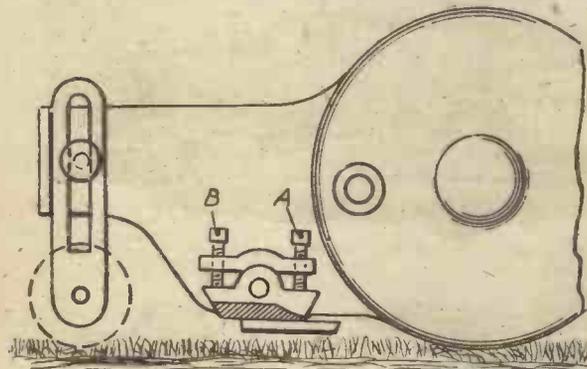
Part of one of the side frames showing the fixed cutting plate and adjusting screws.
